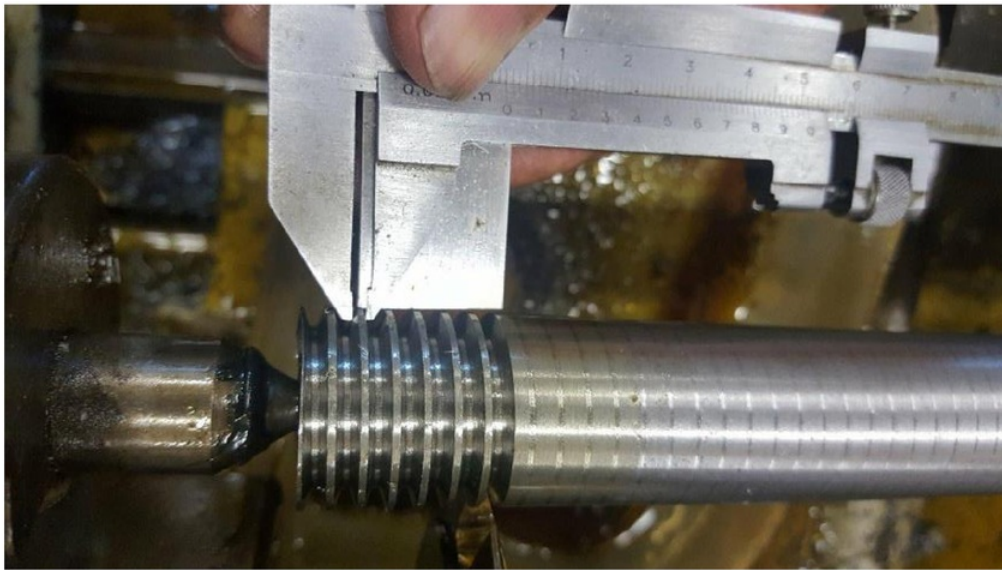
Measuring a single screw wheel teeth by a tooth vernier tool.
